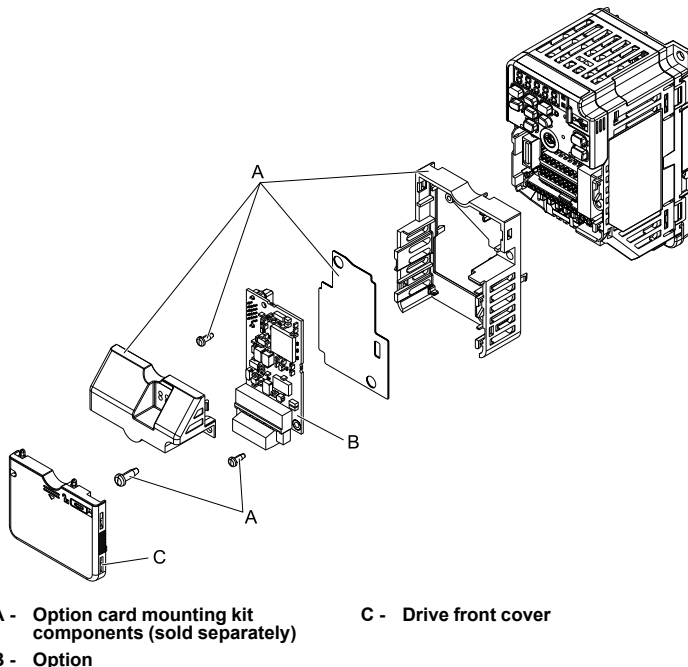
Option Card Mounting Kit (JOHB-GA50)
